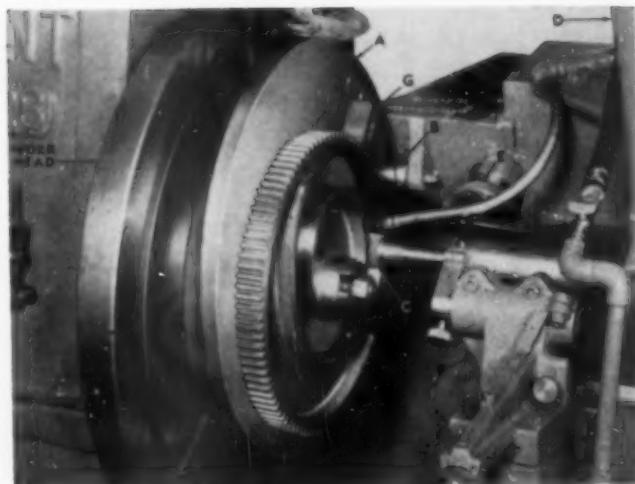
Close-up of the setup showing chain cam and gear in position for cam grinding operation. Letters A, B, C, D, E, F and G indicate respectively master cam, follower roll, grinding wheel, swinging spindle head, adjusting knob for follower roll, diamond wheel dressing fixture and locating block for angular location.
